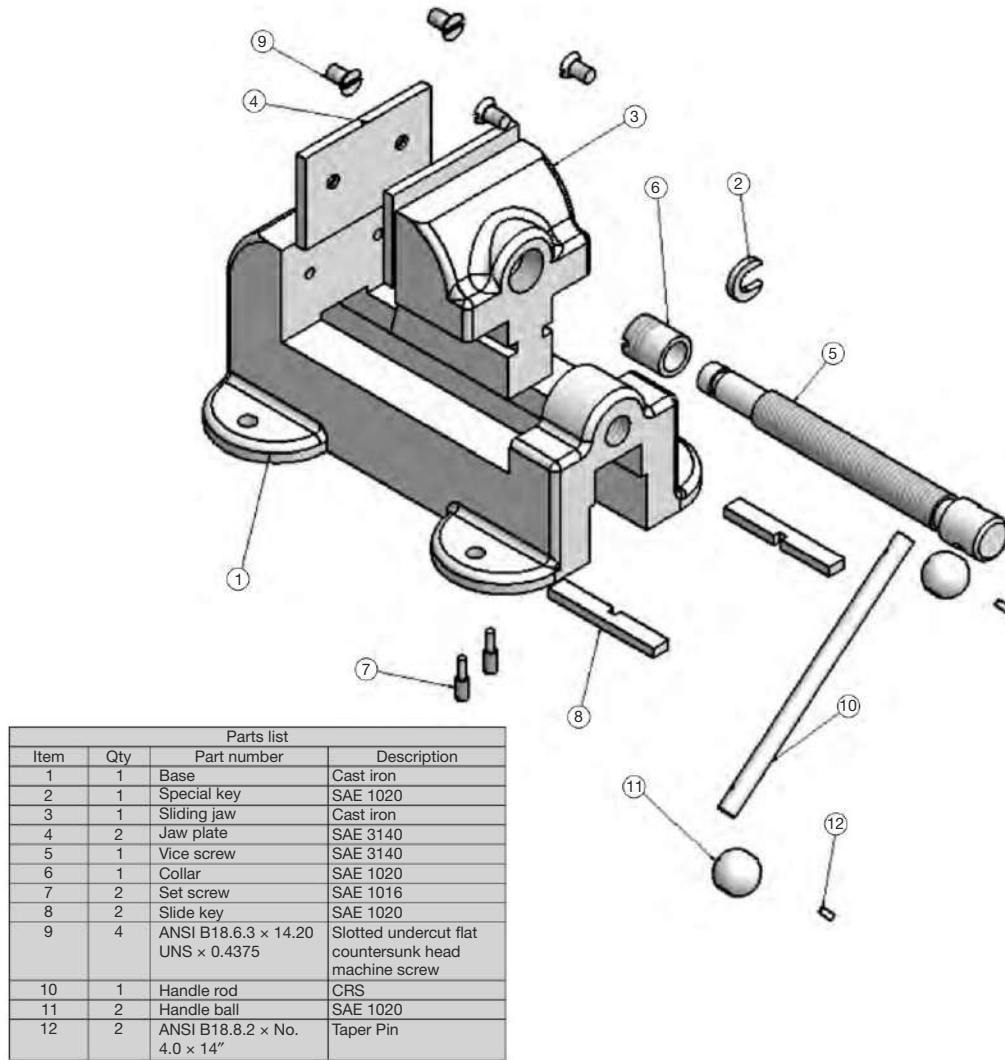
Exploded view and bill of materials of an assembly modelled
